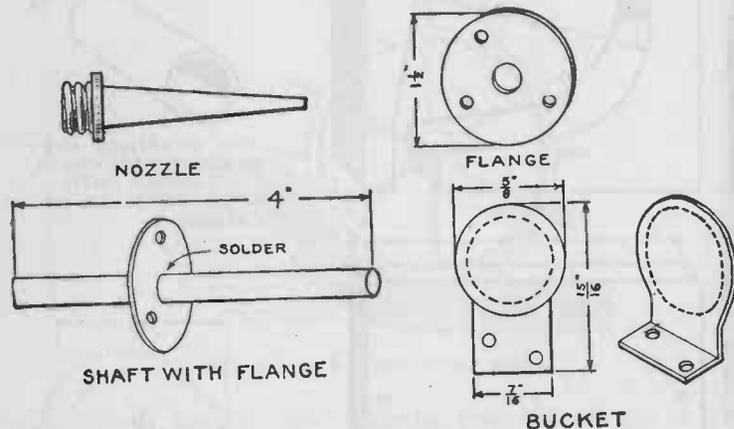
Details of the nozzle, shaft and buckets for the water motor.
